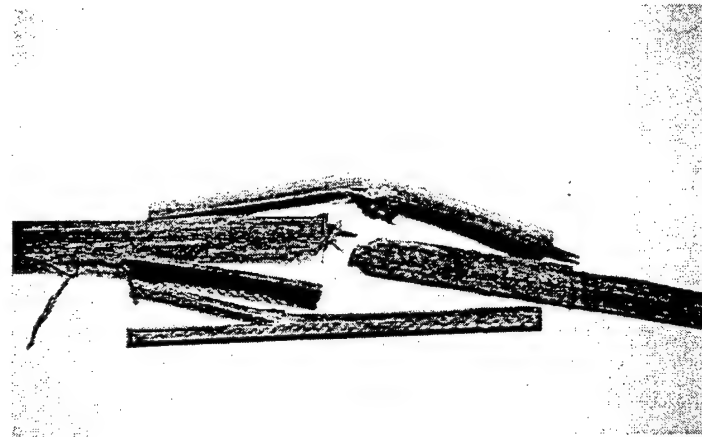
Appearance of Composite Joints after Compressive Strength Tests
